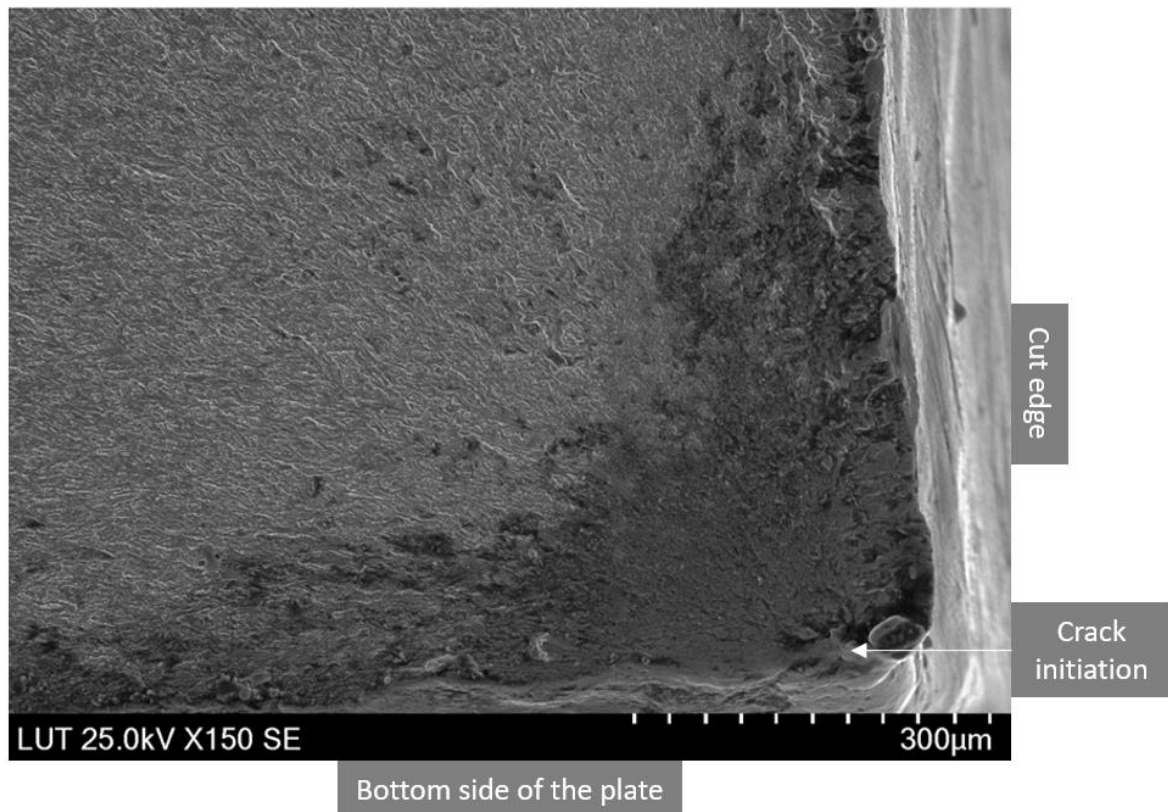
Fracture surface of LF11-1-3 specimen from burr at the bottom corner of the cut.
